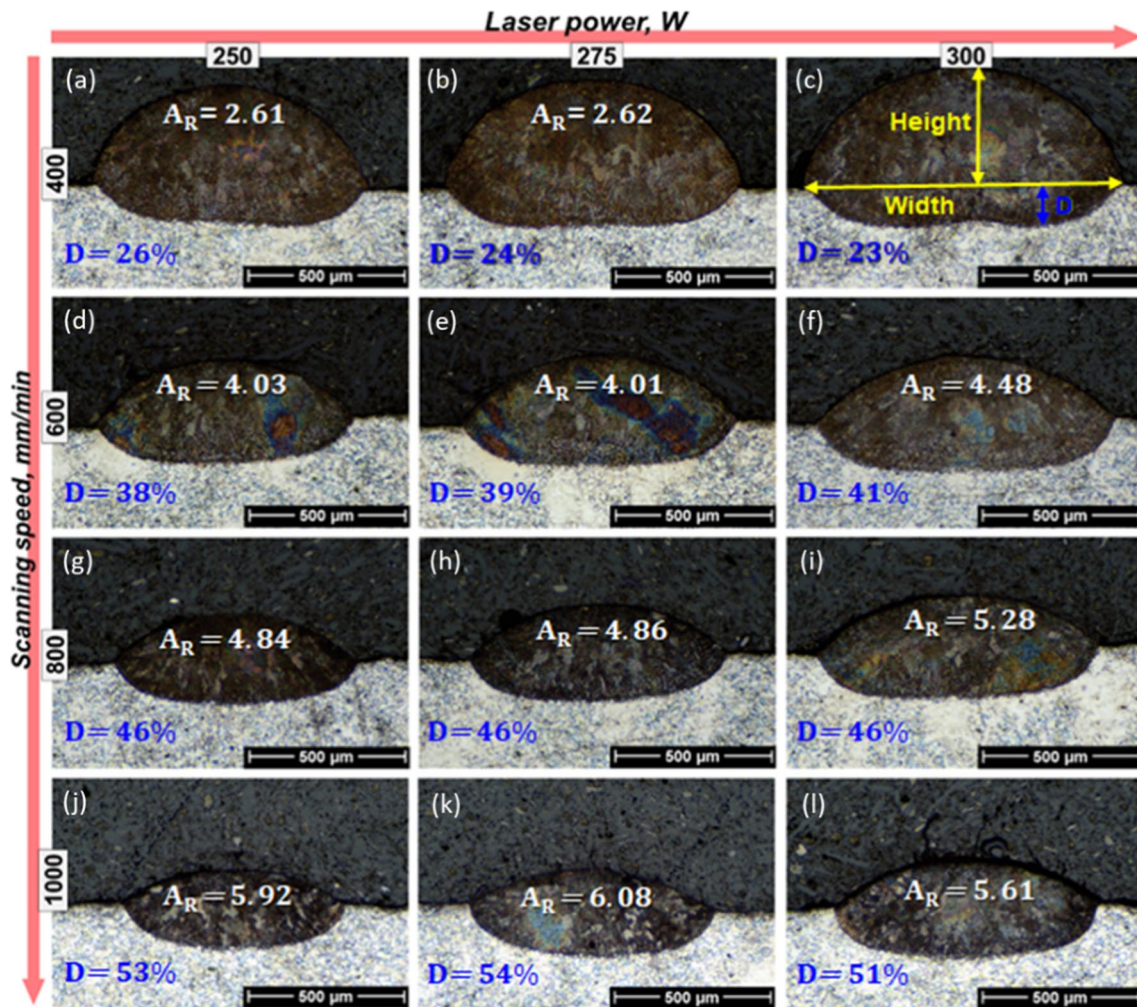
Cross-sectional dimensions for weld beads printed using different sets of process parameters. With: (a), (b) and (c) conducted with a scanne speed of 400 mm/min and a power of 250 W, 275 W and 300 W respectively, (d), (e) and (f) conducted with a scanne speed of 600 mm/min and a power of 250 W, 275 W and 300 W
